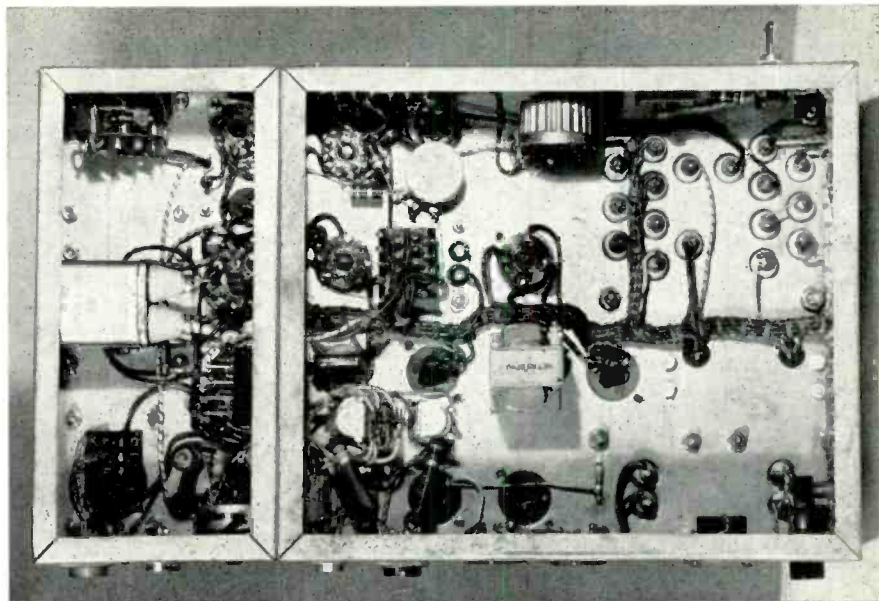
Bottom view of two units bolted together, showing cabled wiring and use of resistor mounting strips.
